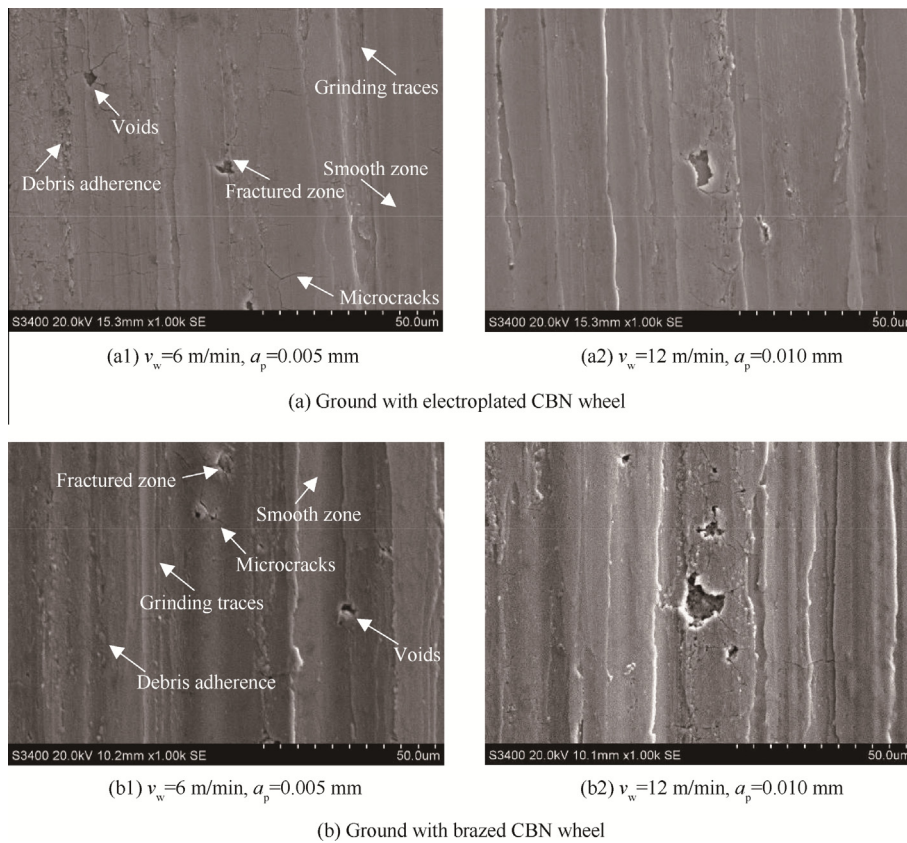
Morphology of PTMCs surface produced in high-speed grinding.
